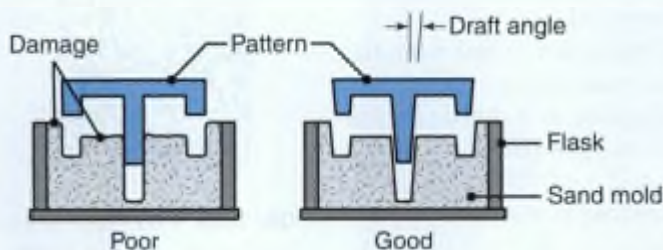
Taper on patterns for ease of removal from the sand mold.
